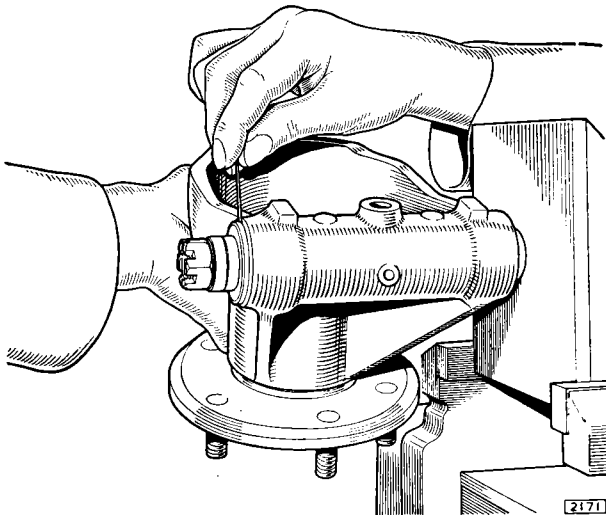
Measuring the amount of clearance between the hub carrier and large washer to determine the end float in the bearings
